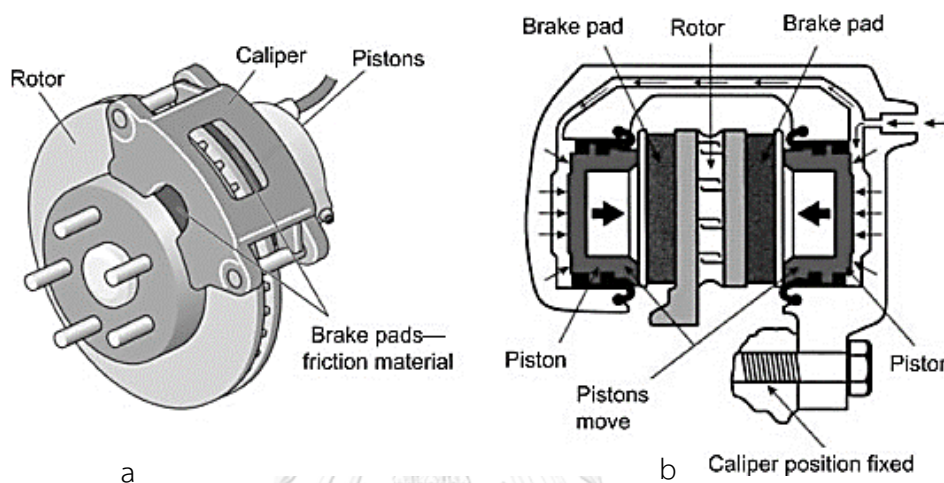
Sketch of Disc Brakes and their Assemblies: (a) Sliding Disc Brake, (b) Fixed Disc Brake [19].
